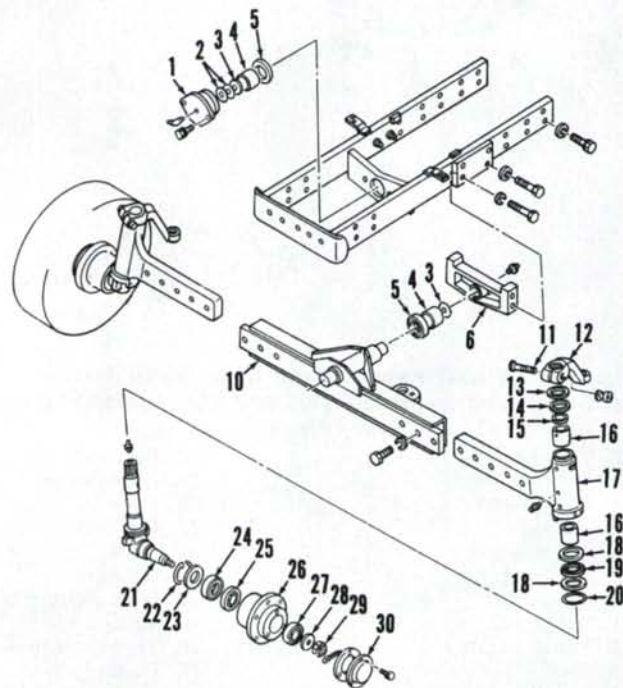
Exploded view of adjustable tread width front axle assembly used on Model 1520. Refer to Fig. 3 for legend except for axle extension (17).
